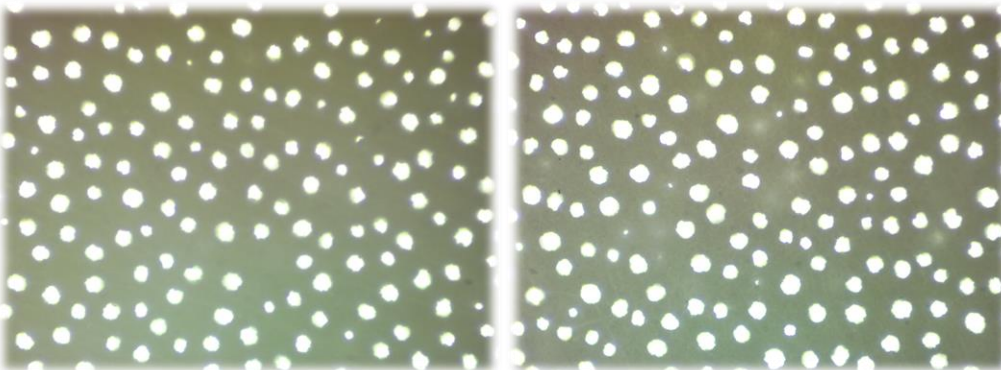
Pictures with 10x lens of bottom surface with 114 and 116 μ m of material removal.
